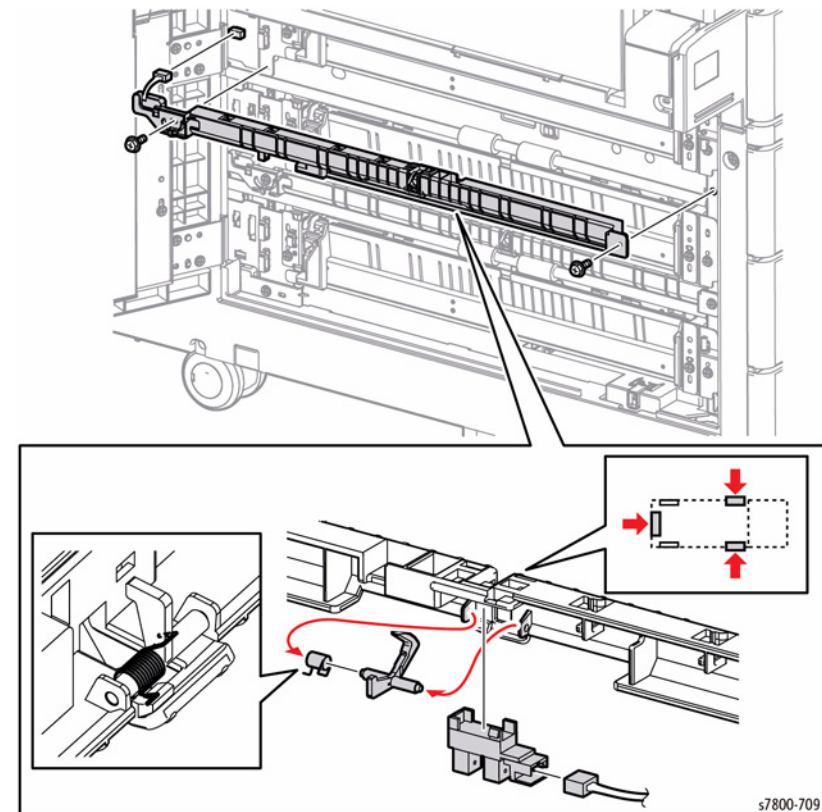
Removing the Chute Assembly/ Tray 4/5 Feed Out Sensor
